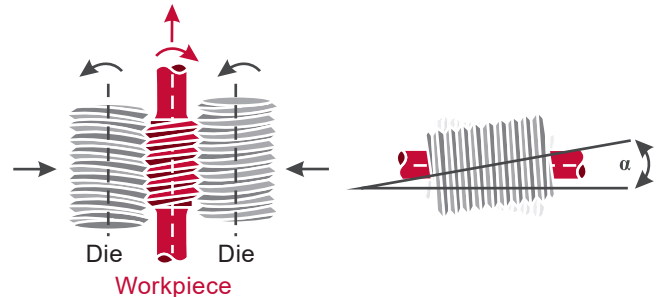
Thrufeed Thread Rolling with pitch corrected Thrufeed Dies (TDU)
